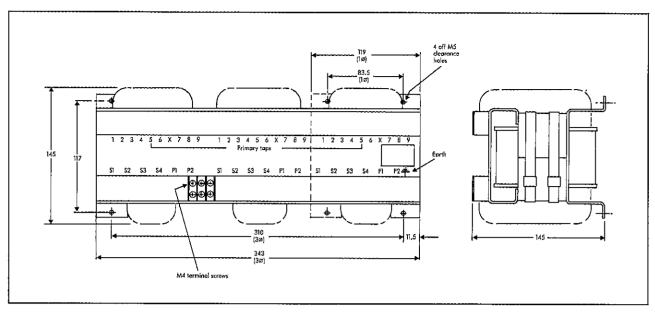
Outline details of single and triple unit auxiliary interposing transformer assembly.
